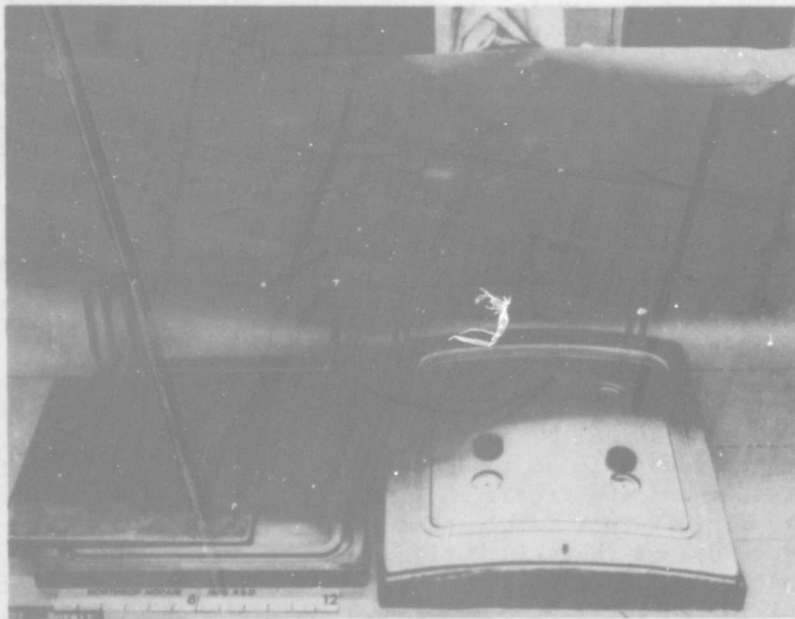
DIES, FILLER AND WIPER RINGS USED IN FORMING WELD MELT DOWN FLANGE ON FLAT (LEFT) AND CURVED (RIGHT) HEAT SHIELD PANEL INNER SKINS
